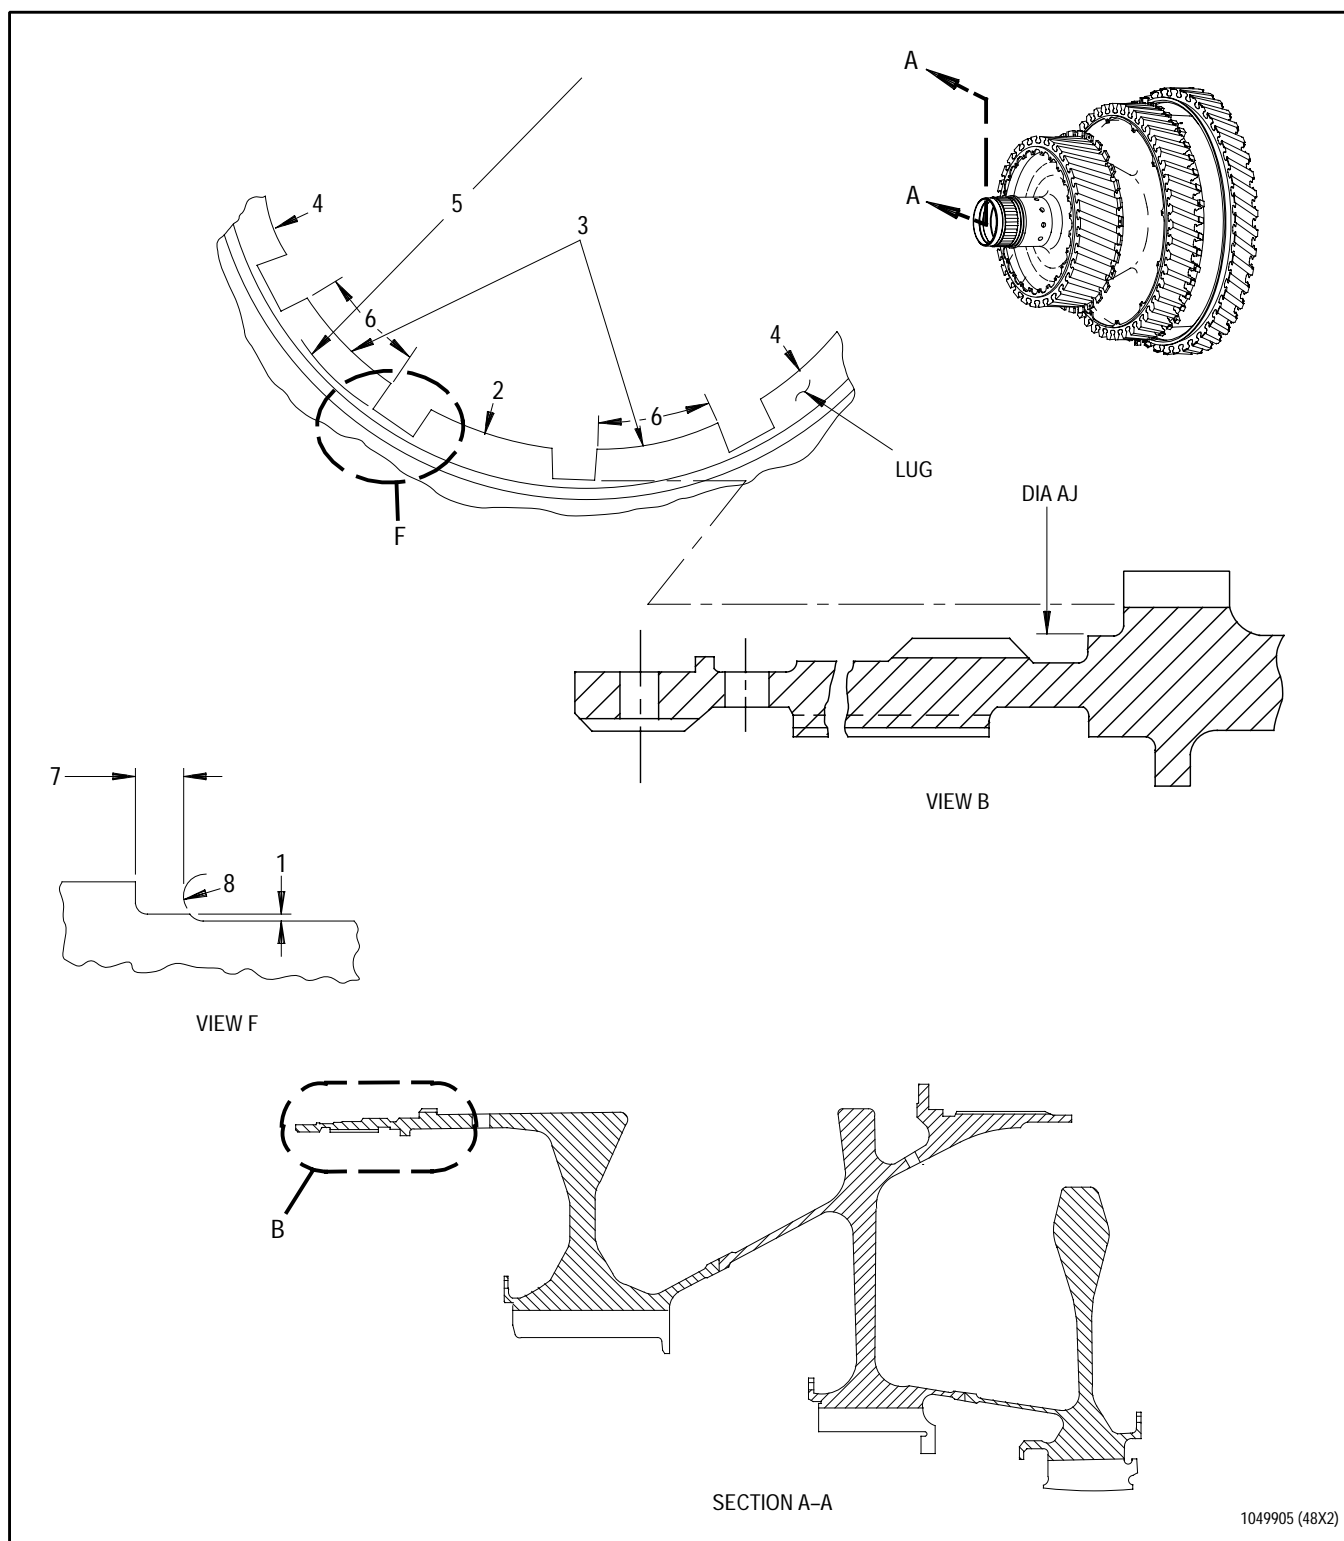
Front Compressor Drum Rotor Disk Assembly - Removal of Slots
